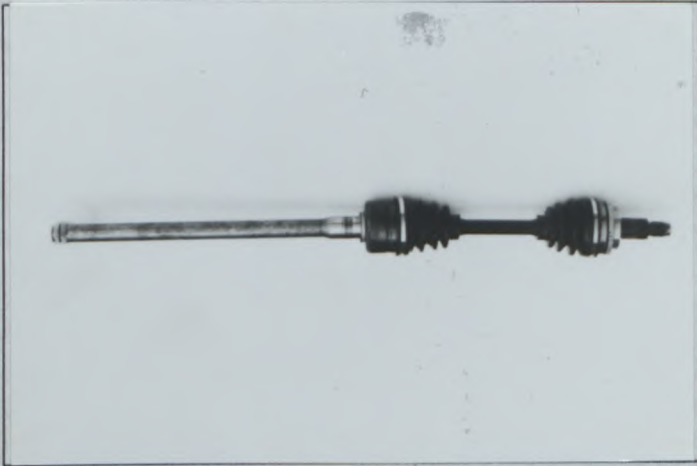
Reinforced drive shaft front right TYPE C
